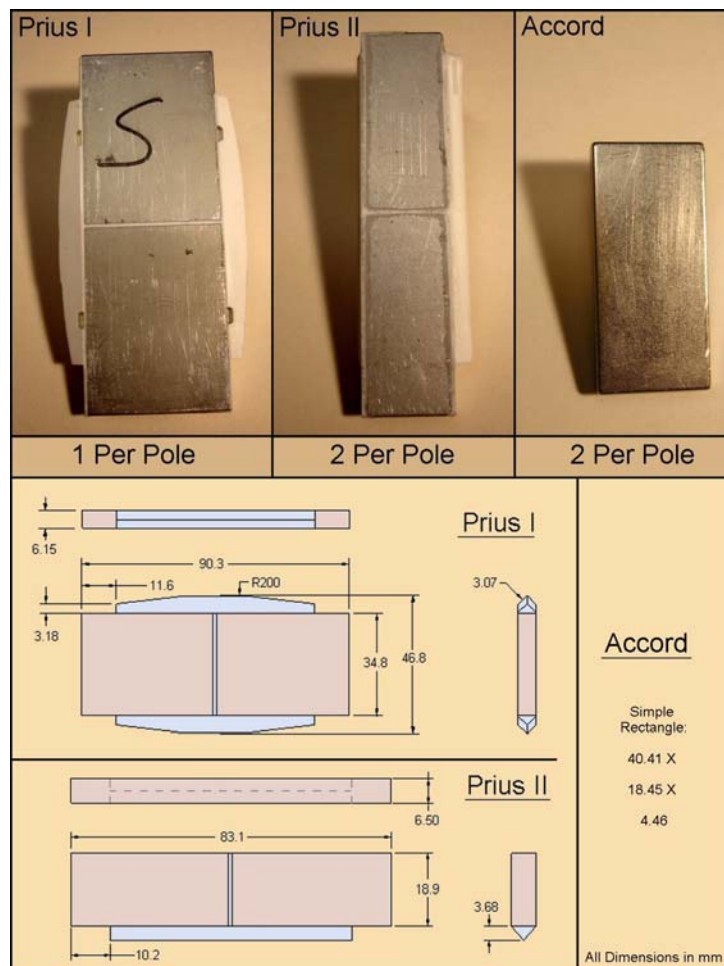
PM configurations and dimensions for three hybrid rotor designs.
